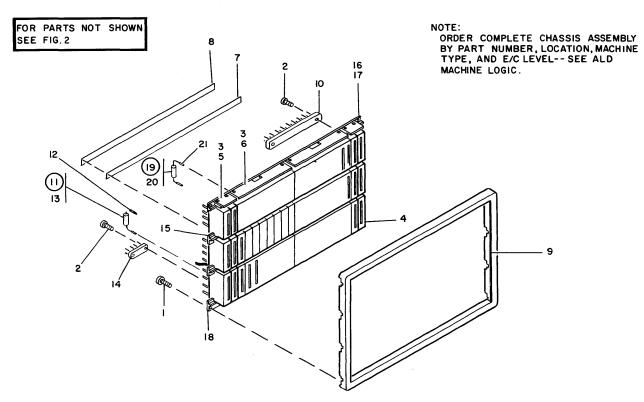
CHASSIS ASSEMBLY. SEE LIST 17.
